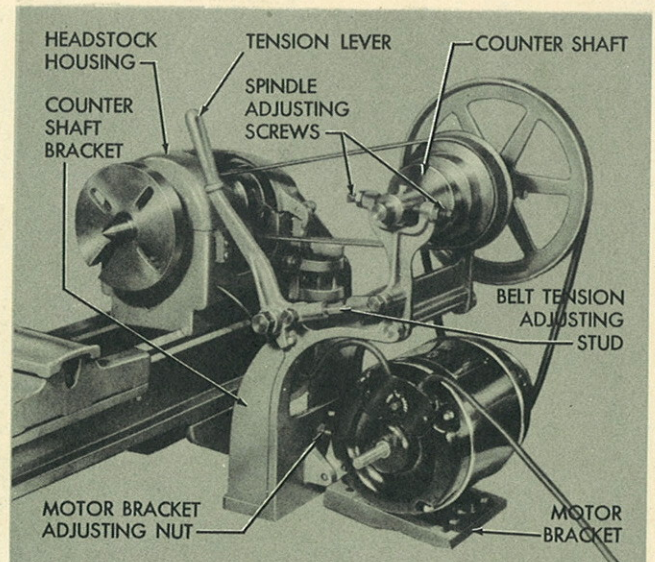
HEADSTOCK AND COUNTERSHAFT BRACKET
